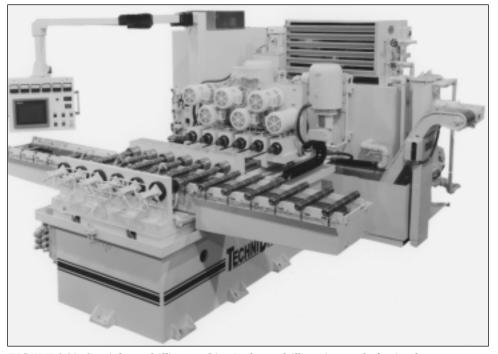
Special gun drilling machine is shown drilling six camshafts simultaneously. This machine includes automatic loading and unloading of parts. (Courtesy TechniDrill Systems, Inc.)
